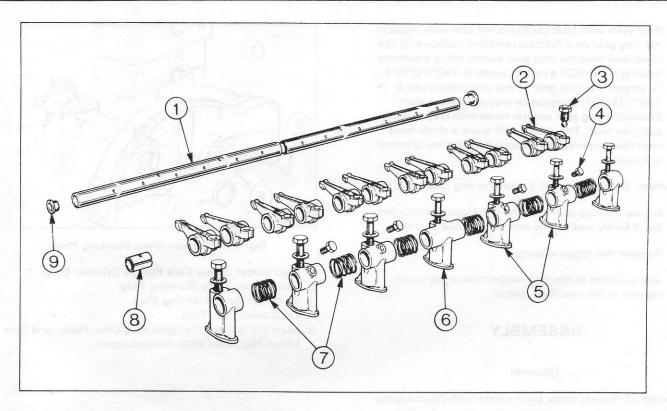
Rocker Shaft Assembly Exploded - 6 cylinder Engines
